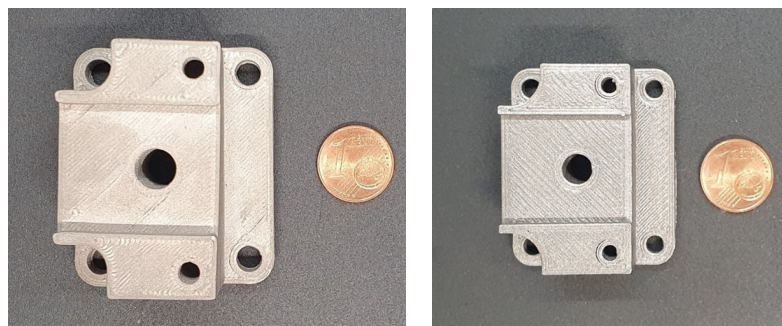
Left: sintered and twisted 17-4PH Stainless Steel part; right: deformed sintered Stainless Steel 17-4PH part (design courtesy: Space Structures GmbH, pictures courtesy: 3D Ceram Sinto Tiwari GmbH).
